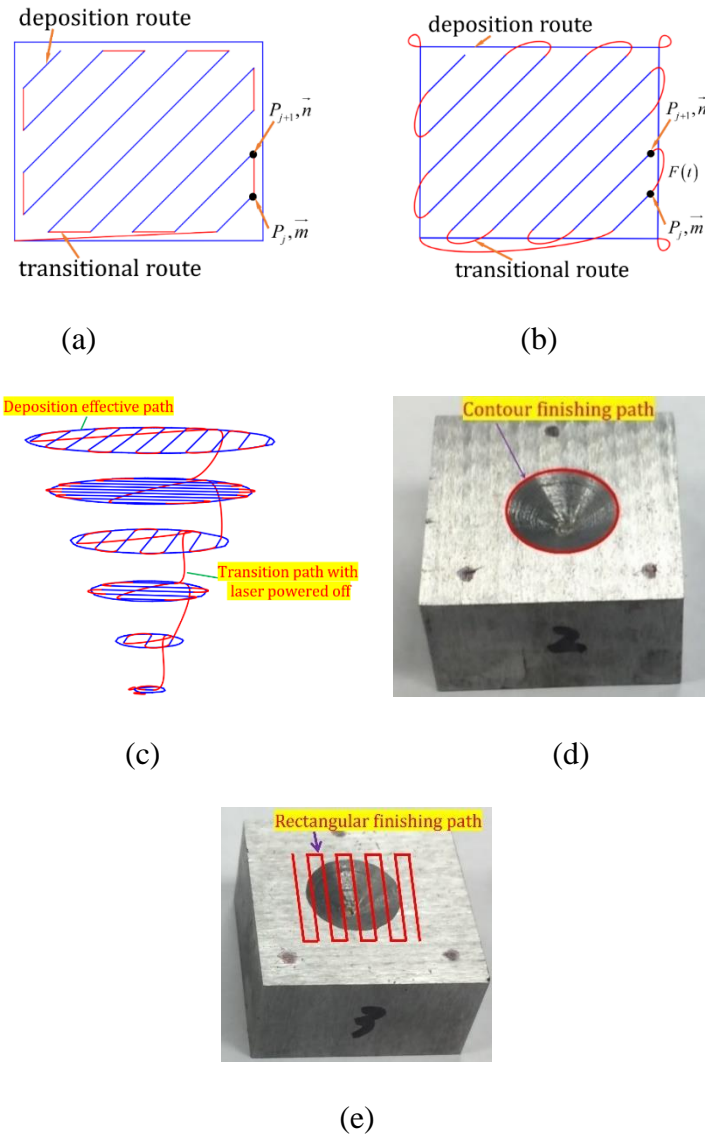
(a) Uncontinuous deposition pattern; (b) Continuous deposition pattern; (c) Repair tool path; Circular (d) and rectangular (e) finishing path
